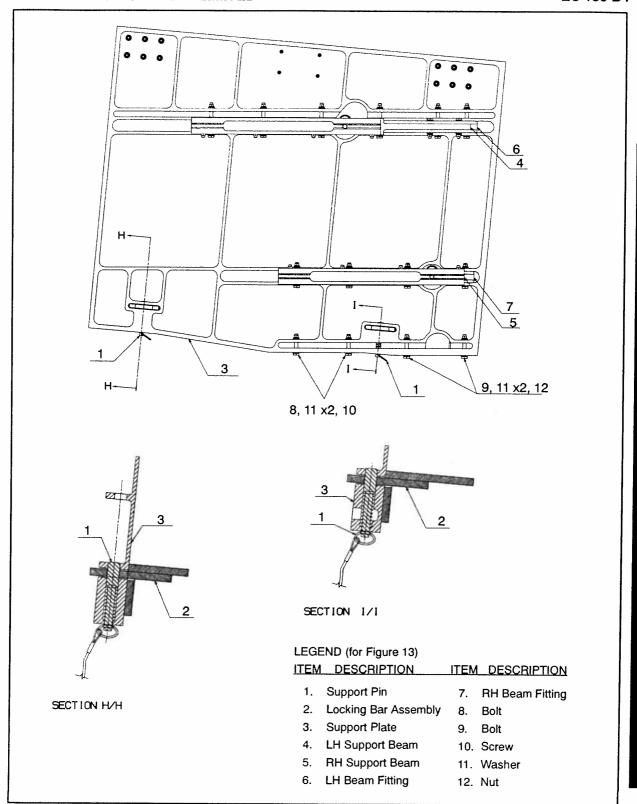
Locking Bar Assembly Details, 7 Place Interior
